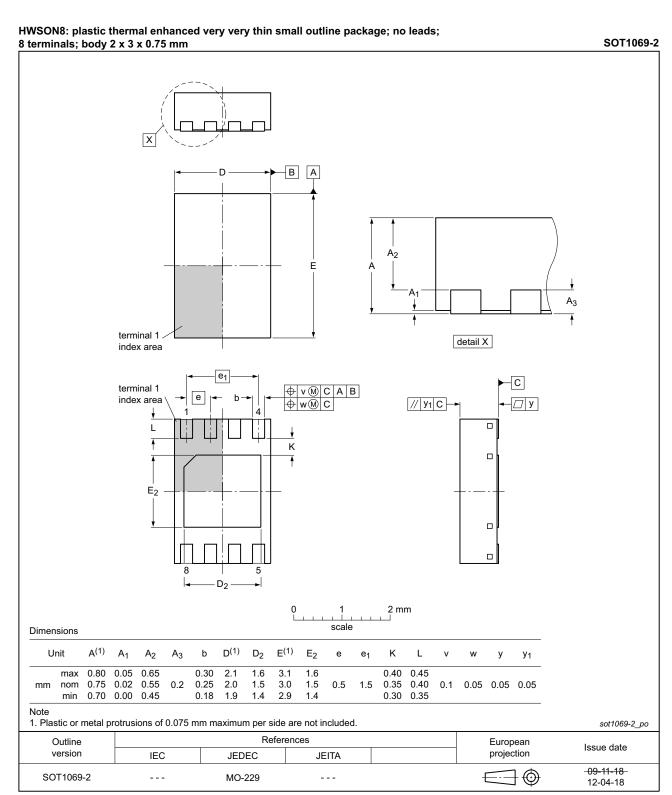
Package outline SOT1069-2 (HWSON8) of PCF85063TP
